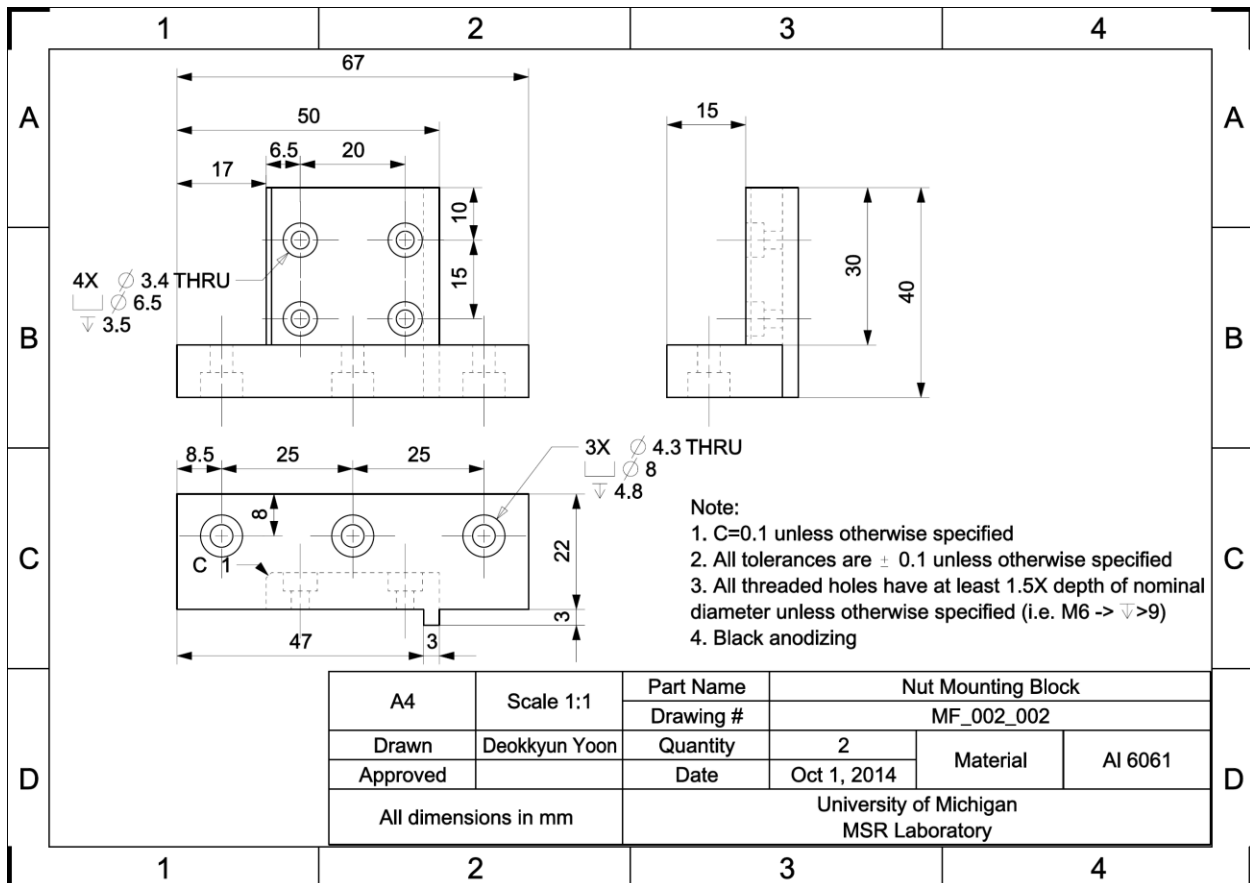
Manufacturing drawing of Nut Mounting Block.
